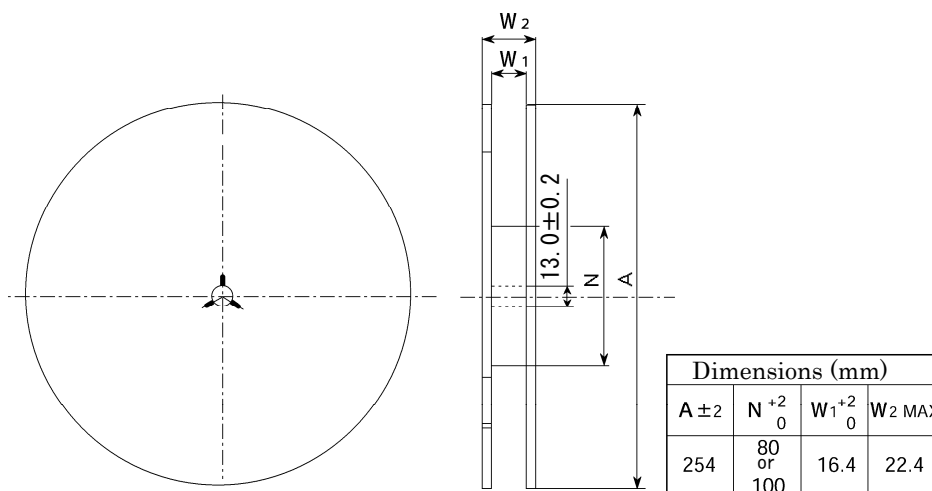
Reel Dimensions (Unit: mm)
